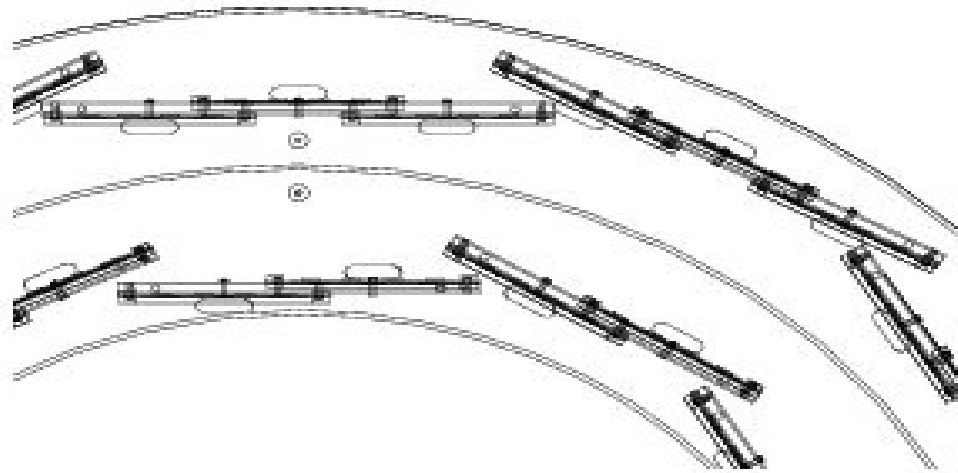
Closeup of one section of the end view of an endplug barrel.
